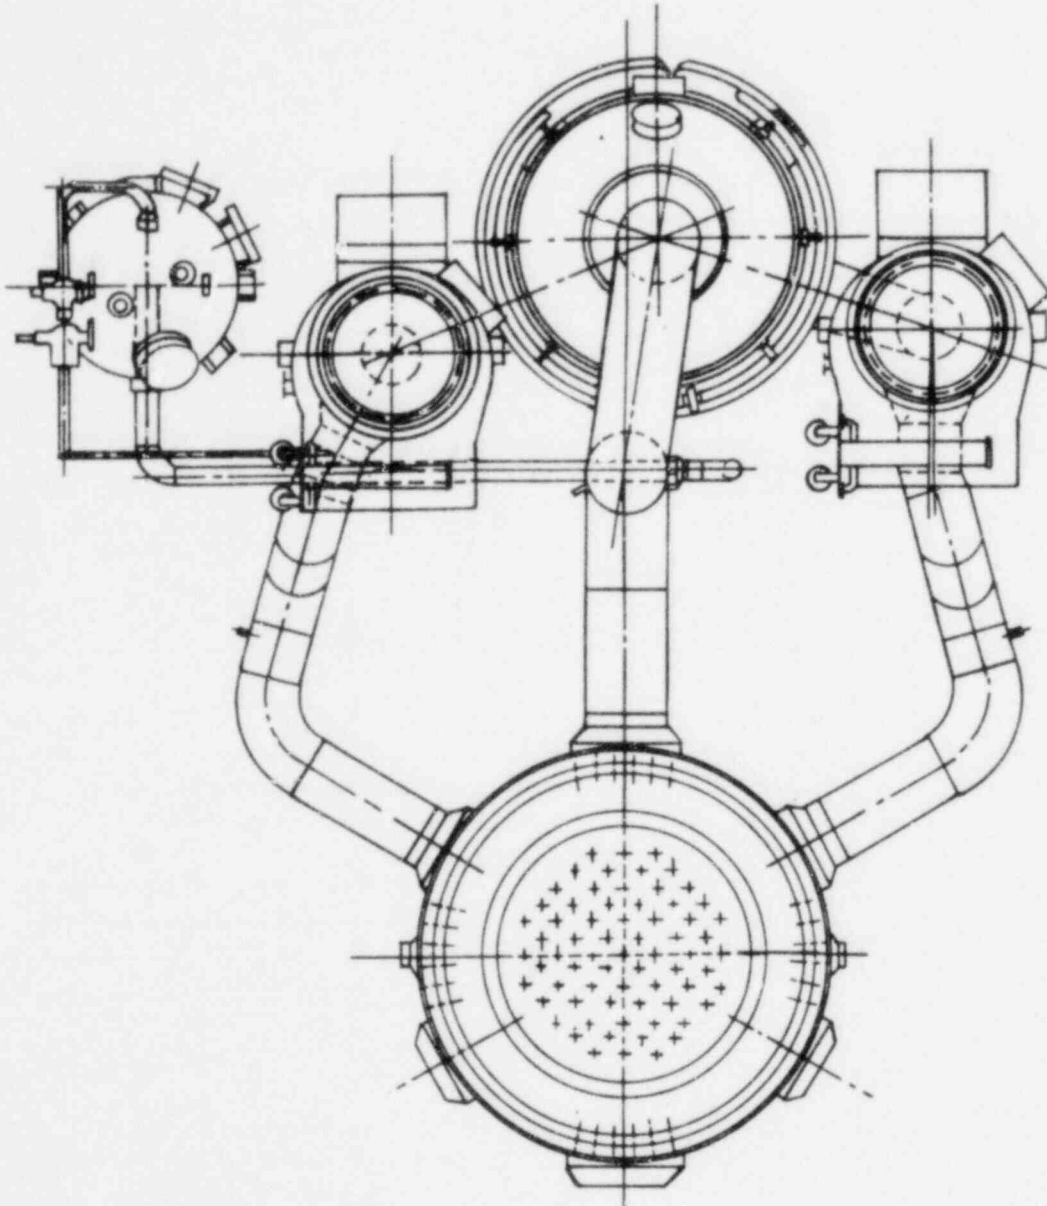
Nozzle-Supported Plant, Elevation View
